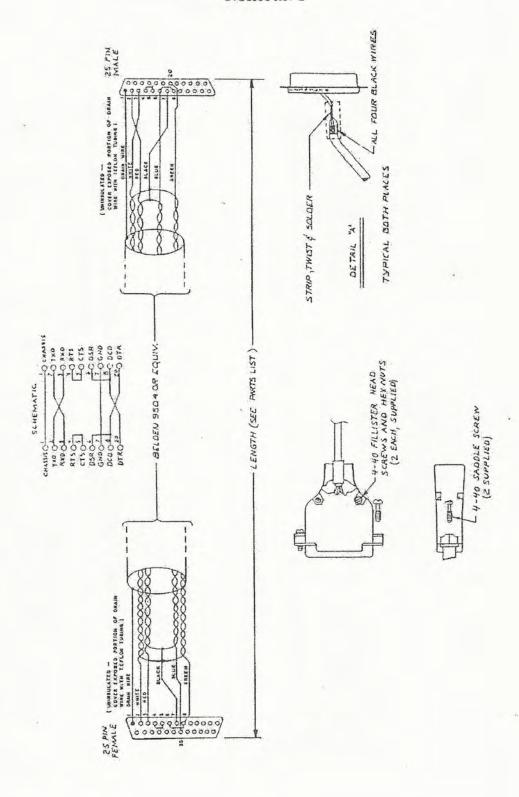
25M-25M Modem Cable Norm Assembly 24C1099 Rev E
